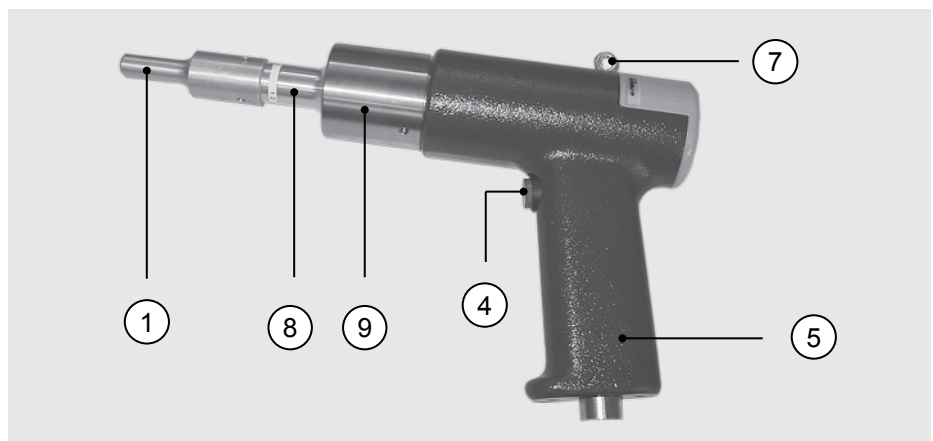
HG35-4 ultrasonic hand welding unit with booster
